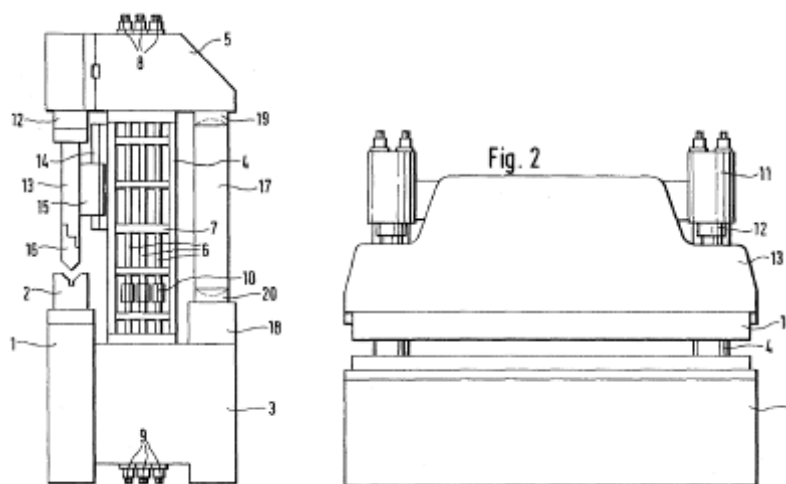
Flanging press with C-frame, pre-stressed by tie pieces [10]
